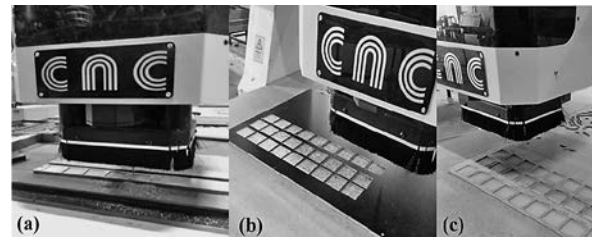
Grooving of plywood (a), particleboard (b) and MDF (c) panels with CNC machine
